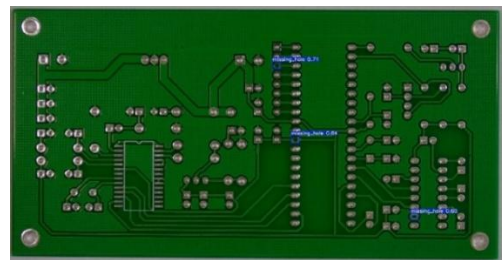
Detected Defects in PCB Using YOLOv5
